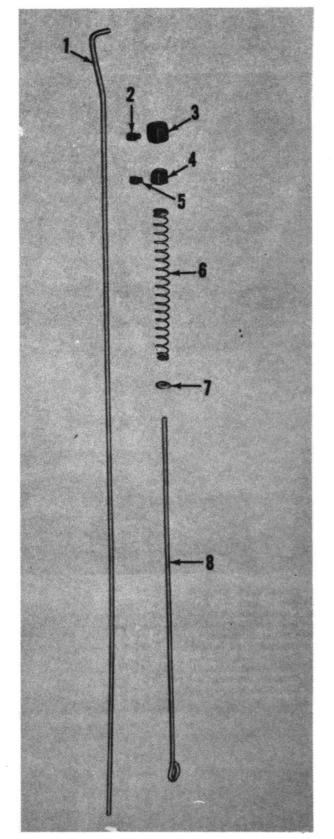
Upper and lower foot lifter treadle pitman rod and related parts, exploded view.
